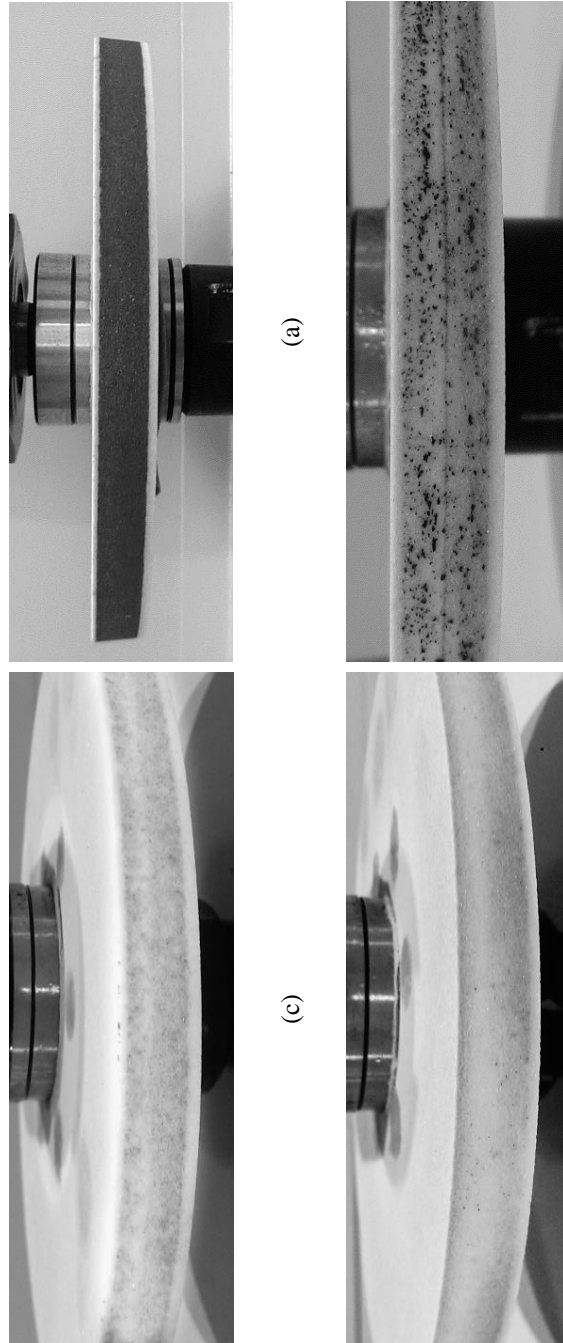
Grinding wheel loading (a) after dry grinding, (b) after cleaning the chips in dry grinding, (c) after MQL grinding, (d) after flood cooling grinding
